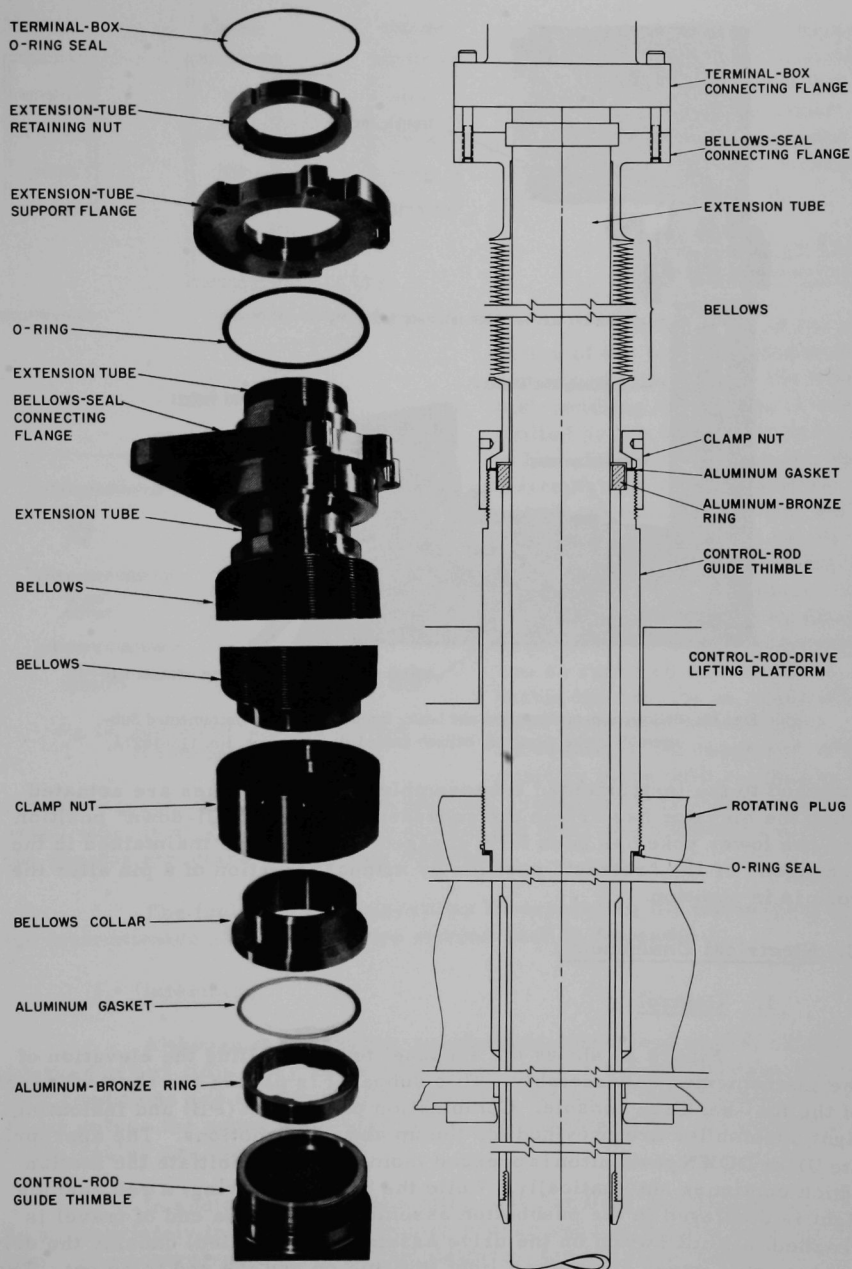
Bellows-seal Assembly of Instrumented Subassembly. ANL Neg. No. 104-223 Rev. 1.
